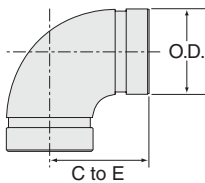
SS 90° STAINLESS STEEL ELBOW
